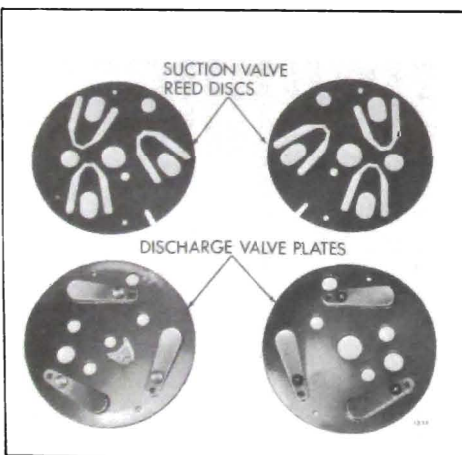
Compressor Suction Valve Reed Discs and Discharge Valve Plates
